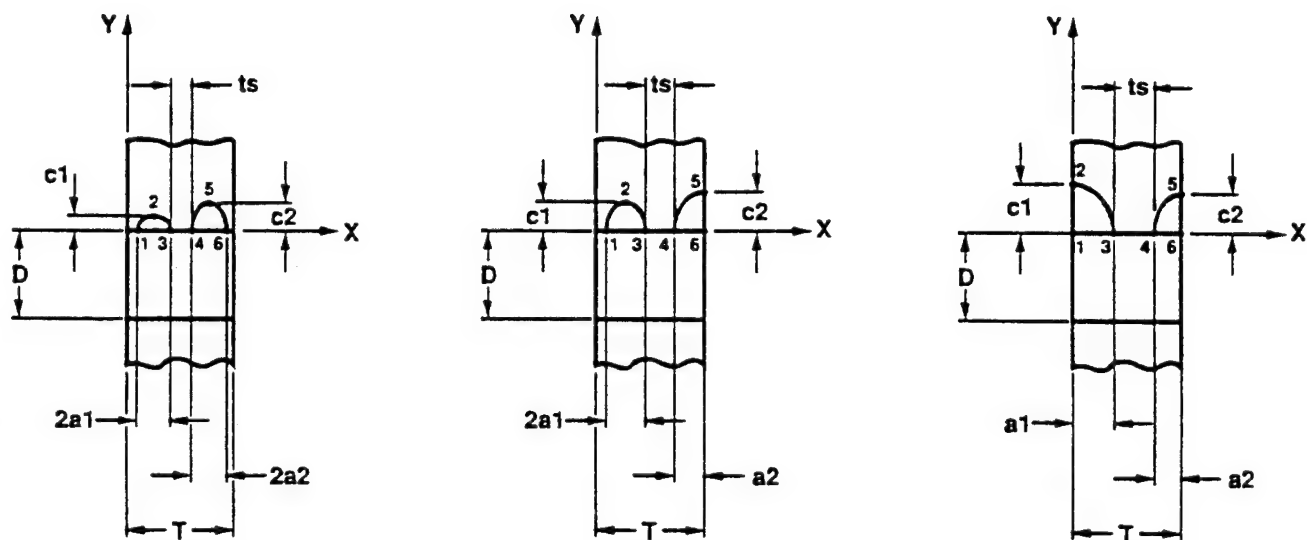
Schematic representation of cracks located along bore of a hole, a) two surface cracks, b) surface and corner crack, and c) two corner cracks.
